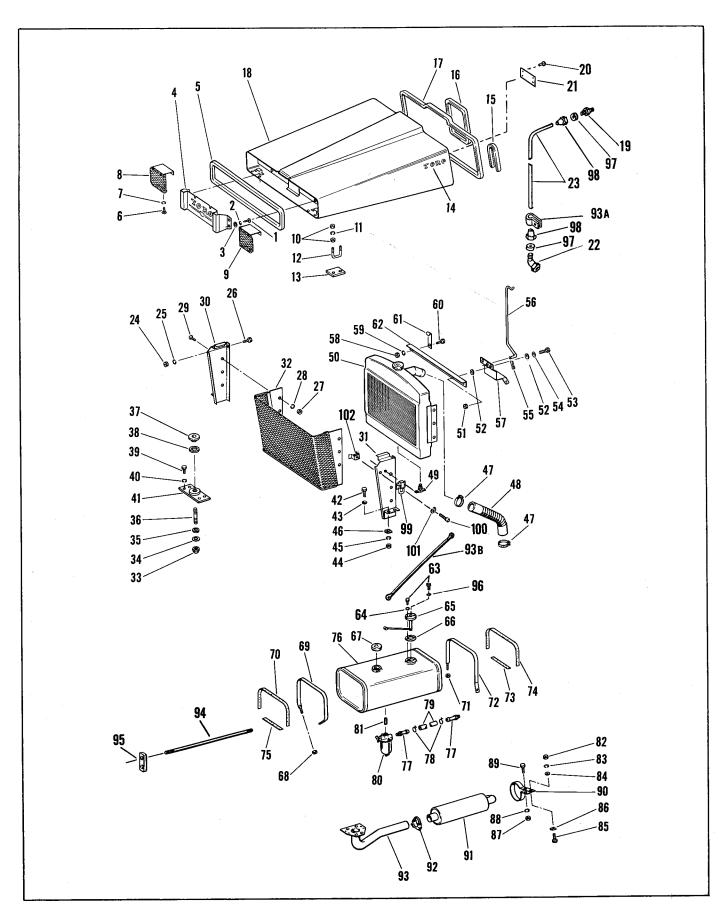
A. Hood, Radiator, Fuel Tank and Muffler
